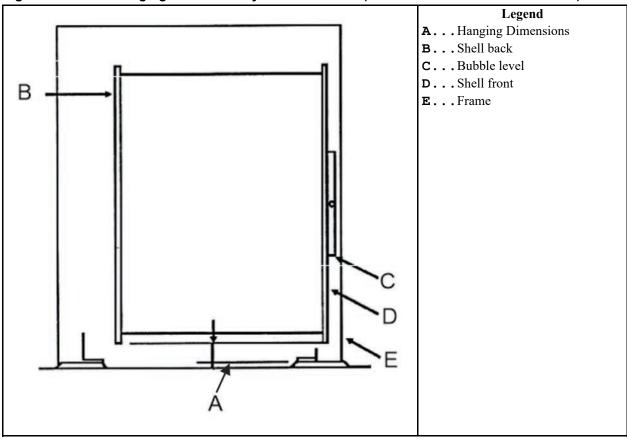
Shell Hanging for Divided Cylinder Machines (Left side view of 60044WE shown)
